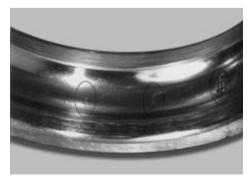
Indentation and Flaking on Outer Ring Raceway of Deep Groove Ball Bearing
